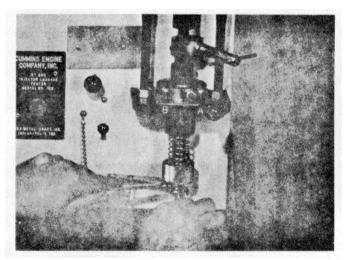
H-29. Using the Feeler Gauge to Check the Locknut
